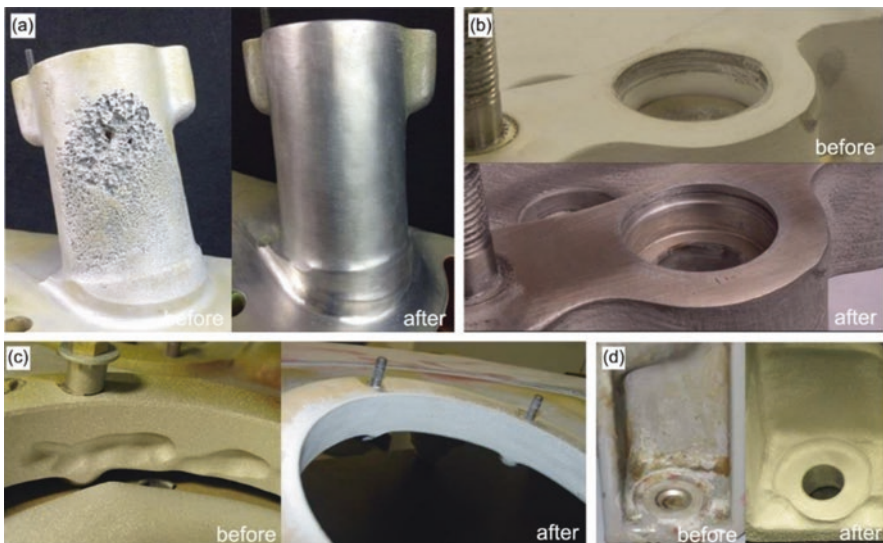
Comparison between damaged and CSR components: (a) S-92 helicopter gearbox sump, (b) oil tube bores in CH47 helicopter accessory cover, (c) UH-60 helicopter gearbox sump, and (d) UH-60 rotor transmission housing (Howe 2014; Kilchenstein 2014; Schell 2016)
